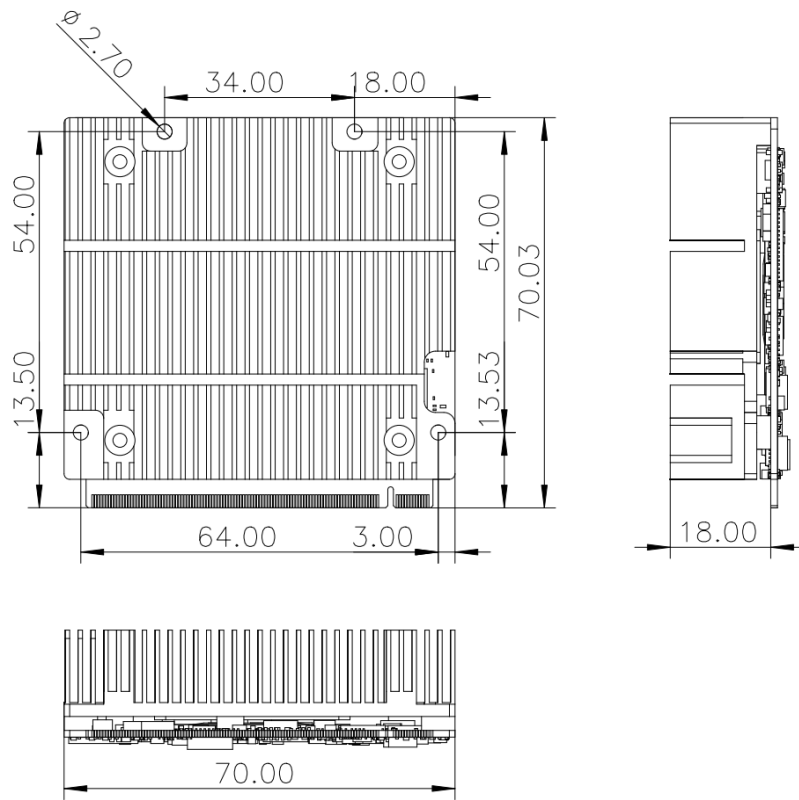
iQ7-ASL Dimensions with Heatsink (mm)
